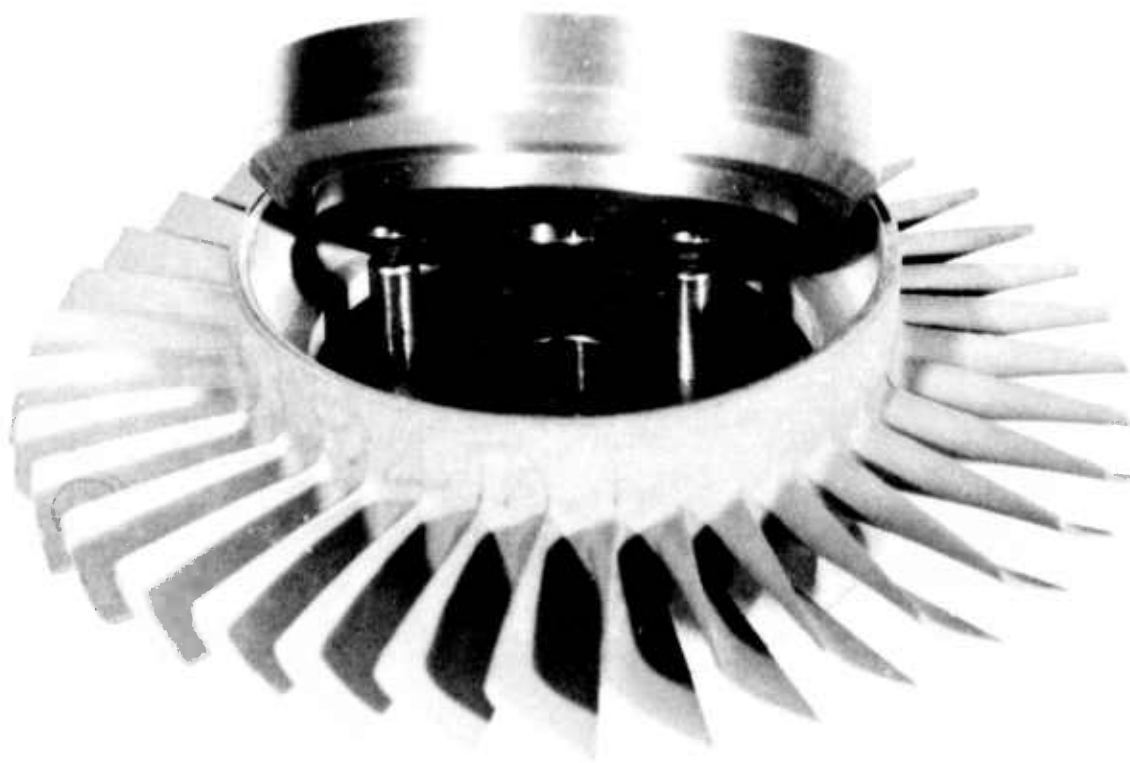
A Complete Molded Silicon Nitride Rotor Blade Ring Ready For Bonding to the Metal Test Hub
